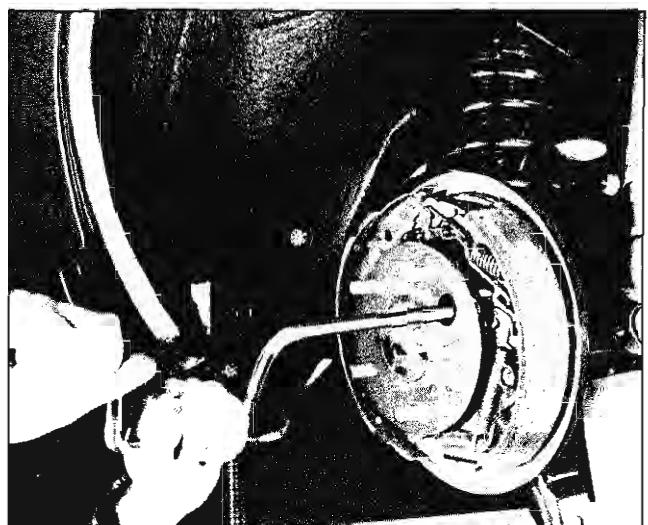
Removing Nuts from Axle Shaft Bearing Retainer
